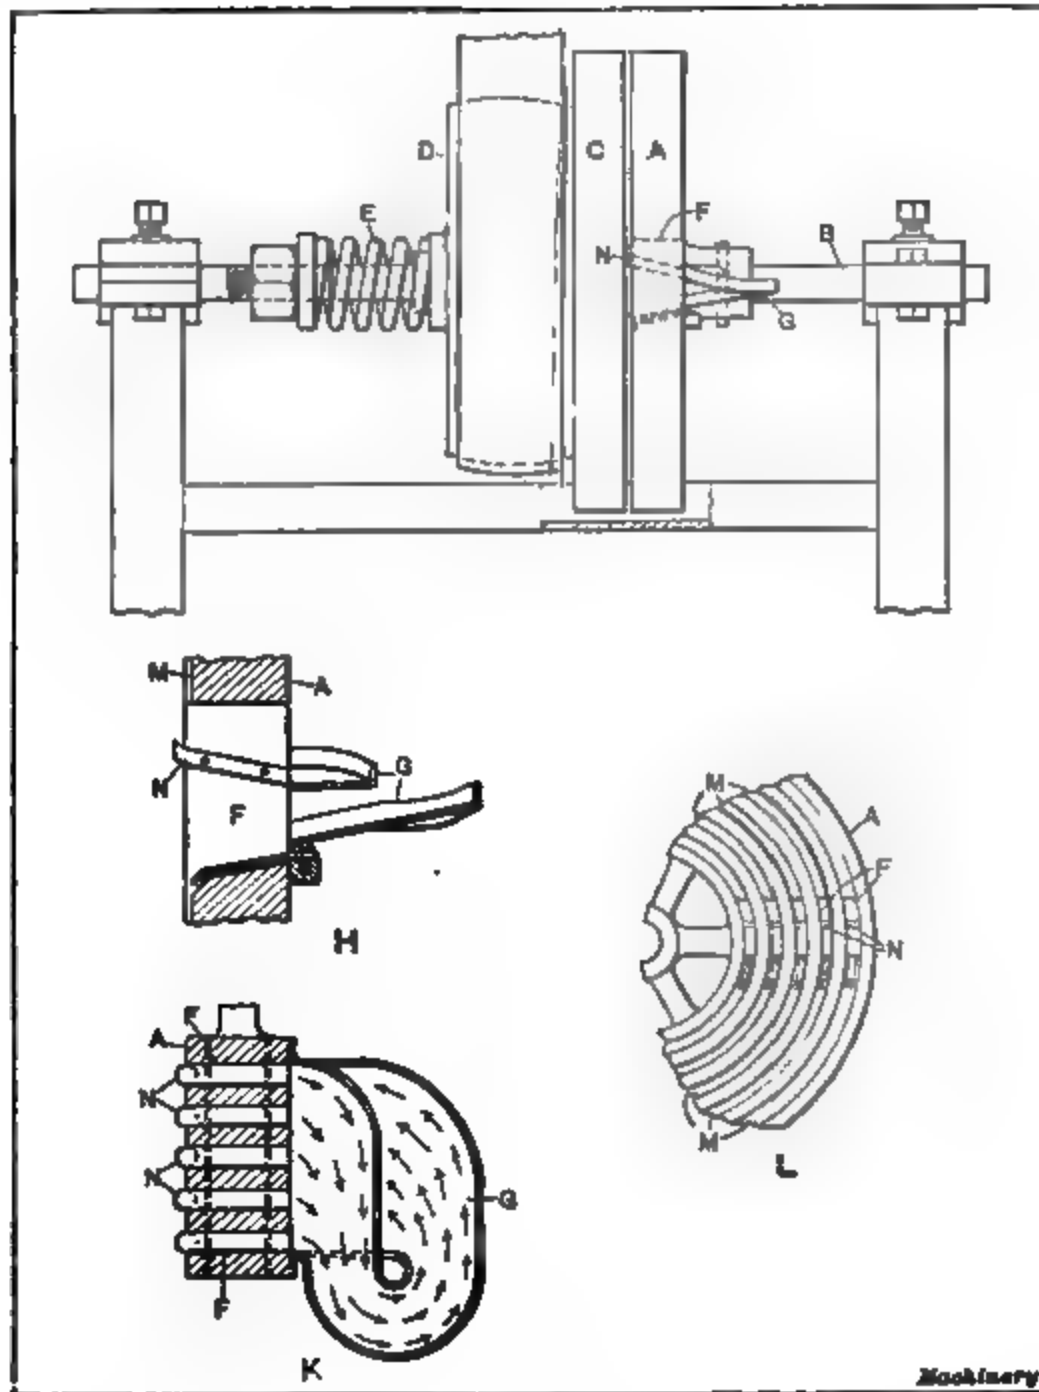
The Hoffmann Ball Grinding Machine—U. S. Patent No. 803,164
